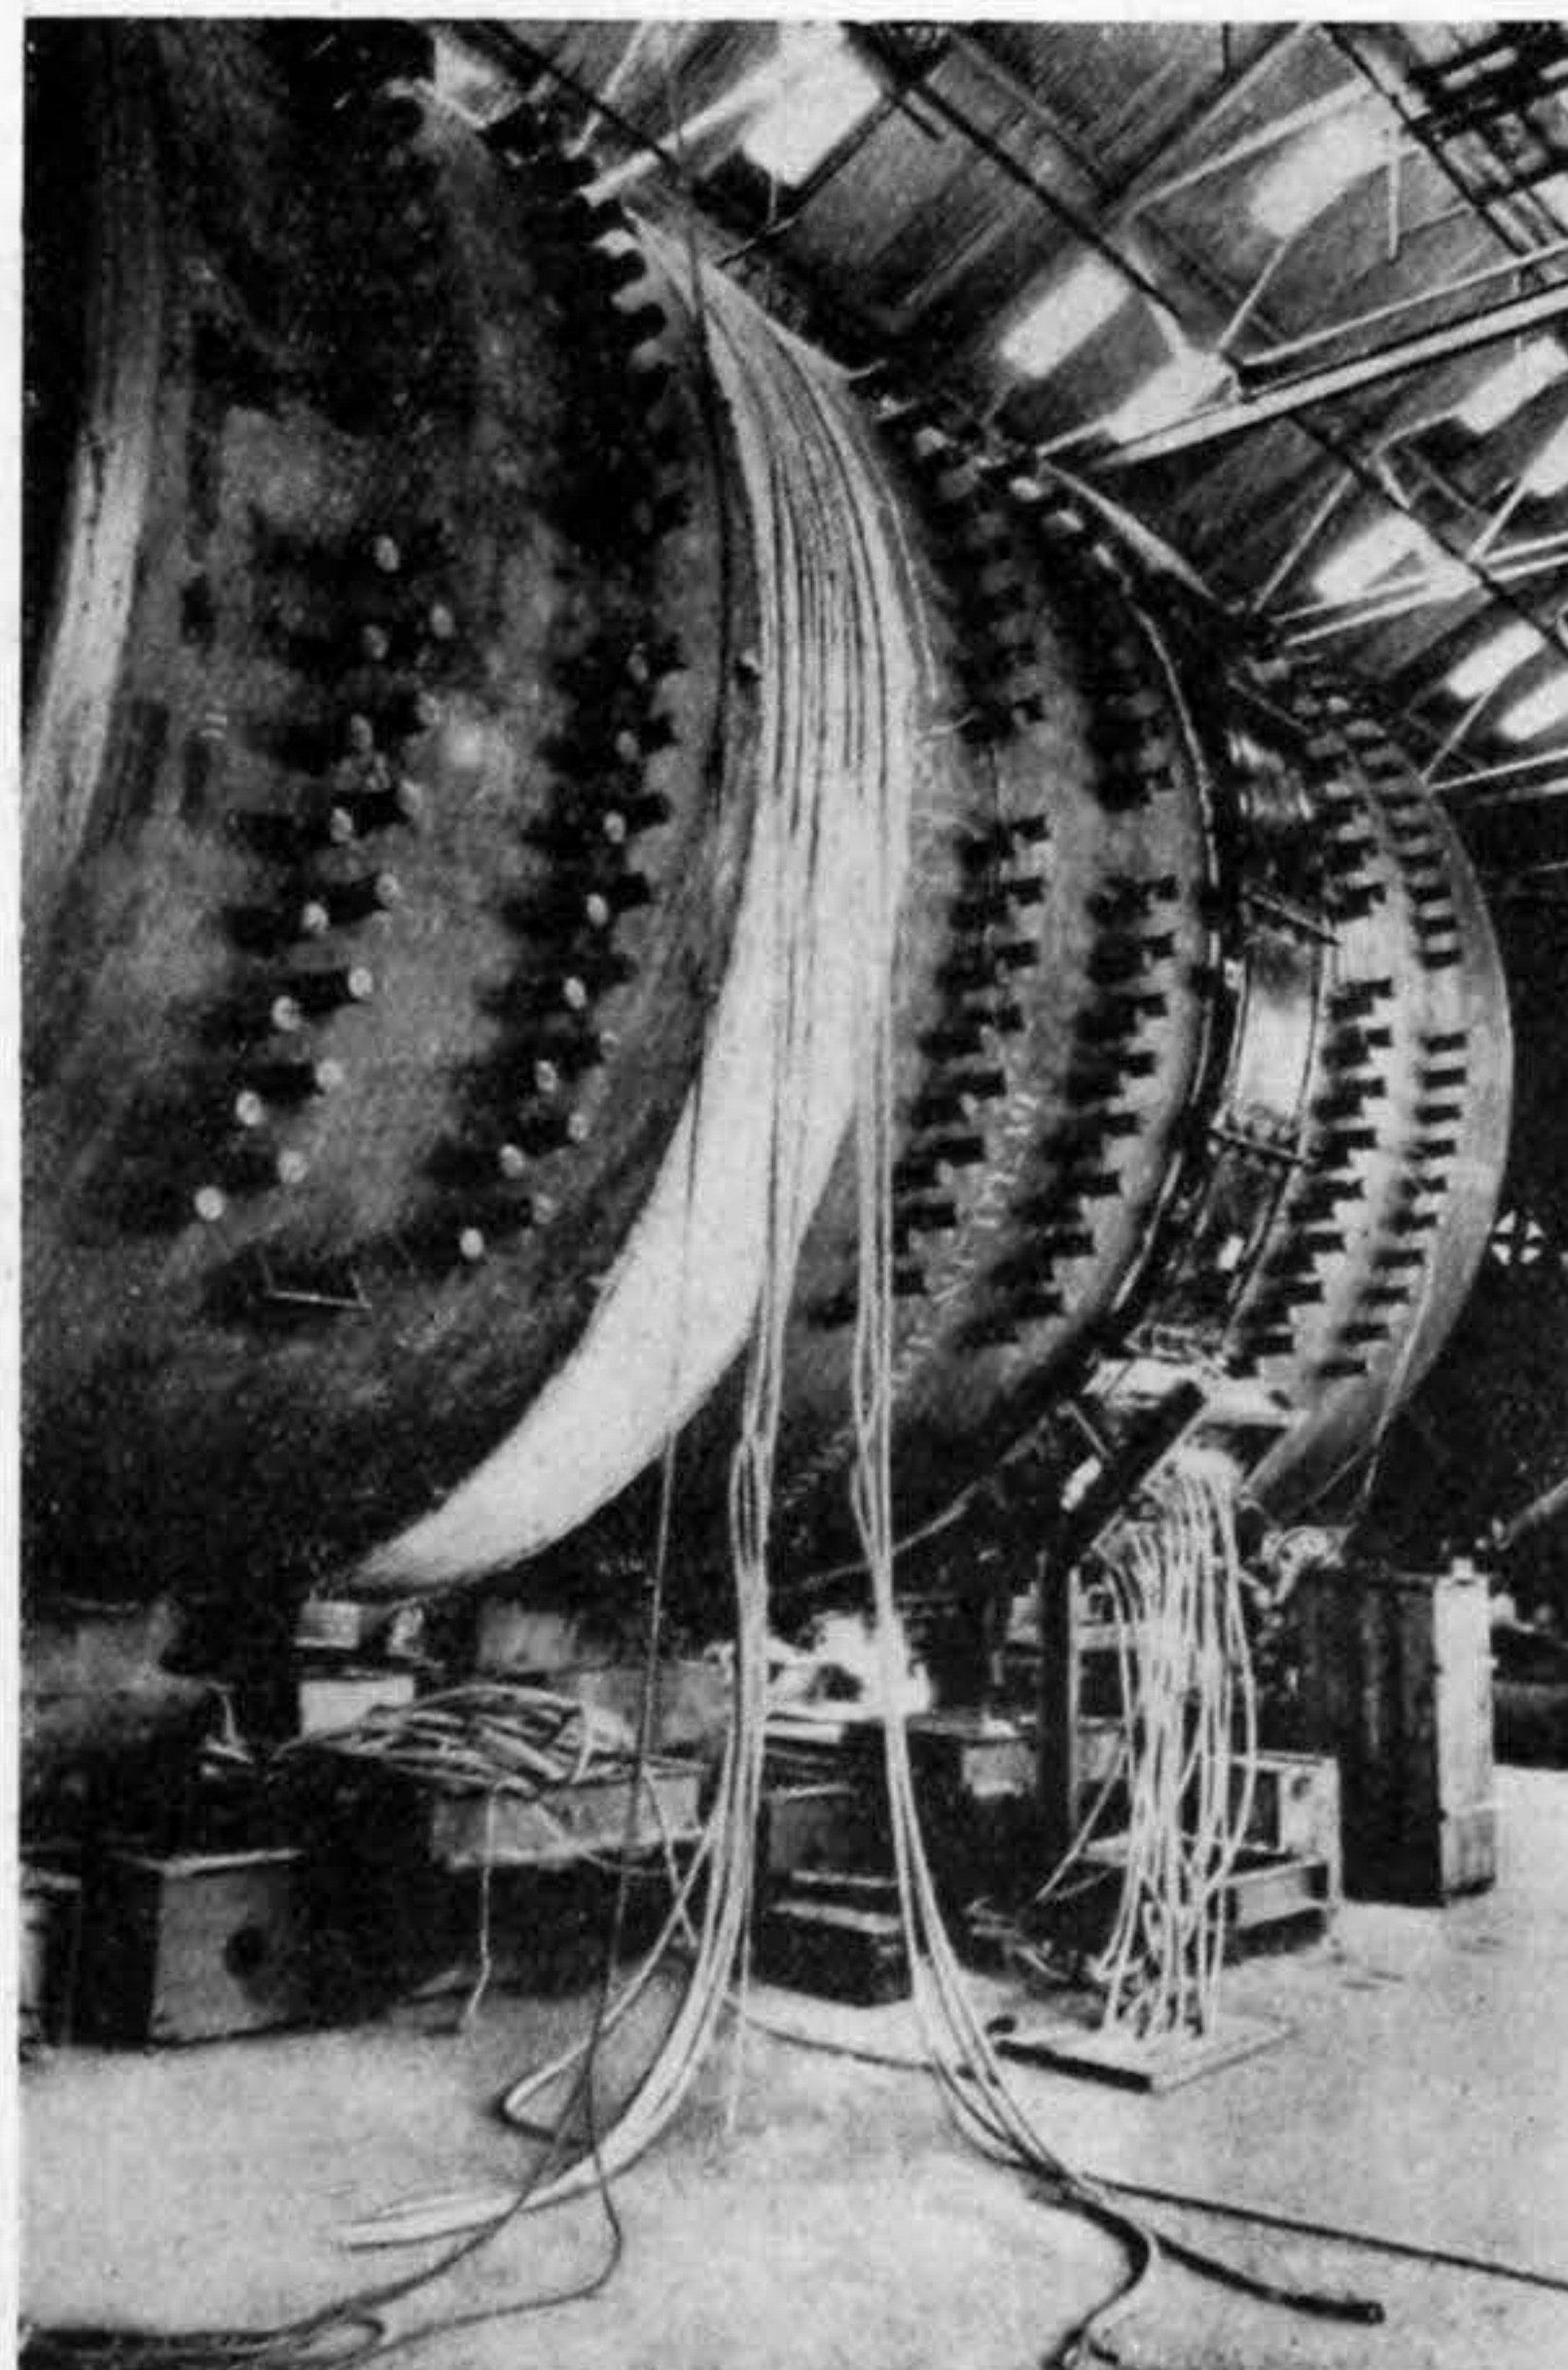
Cables were wound round the heat exchanger shell so that induction heating could be used for preheating the circumferential welds and for the subsequent process of stress relieving
